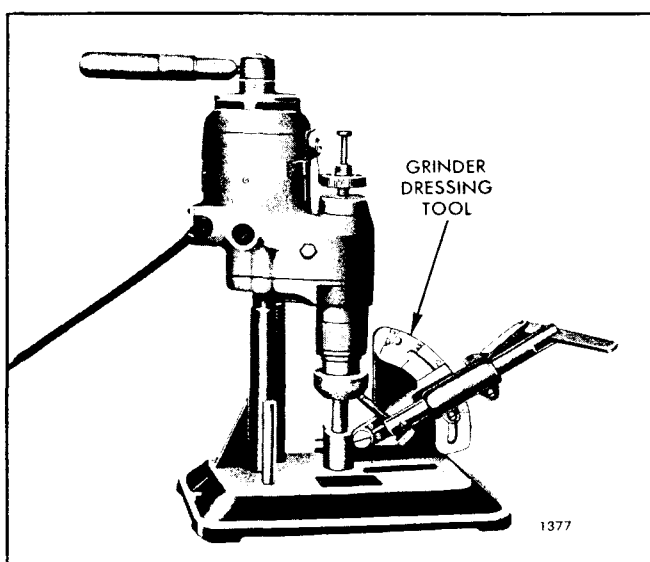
Grinding Wheel Dressing Tool of Set J 8165
